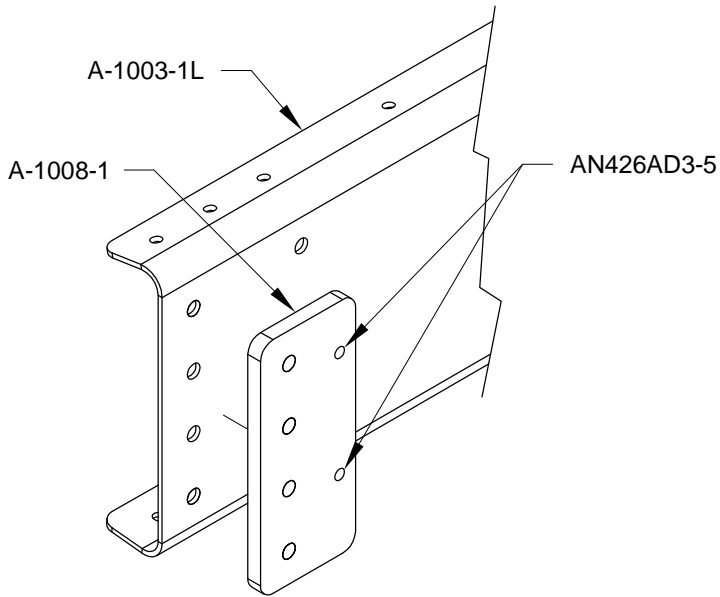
ATTACHING THE DOUBLER TO THE SPAR
